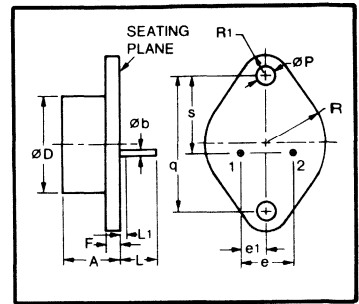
DIMENSIONAL OUTLINE JEDEC TO-204MA (Formerly JEDEC TO-3)
